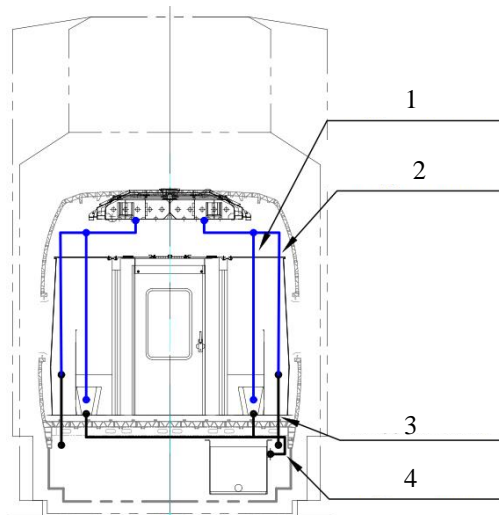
Fresh and Waste Water Piping Diagram on Motor Engine Combustion Engine (Back View)
